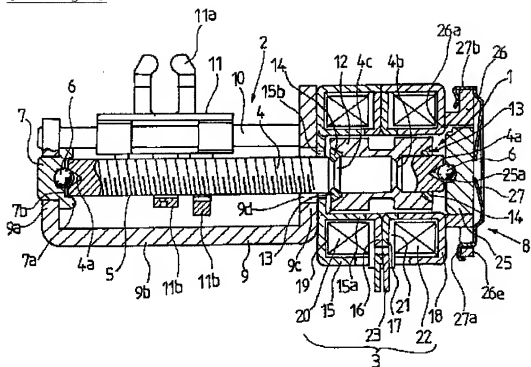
It is a figure showing the conventional stepping motor and its rotor.
